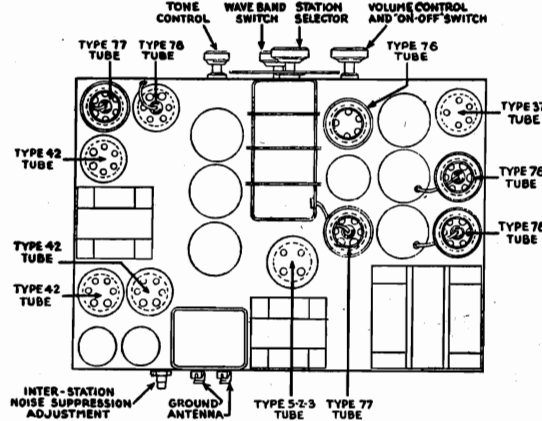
Top View of Chassis, Showing Tube Locations and Major Parts
